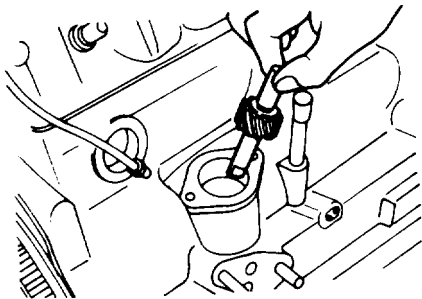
Removal of Distributor and Distributor Driving Spindle
